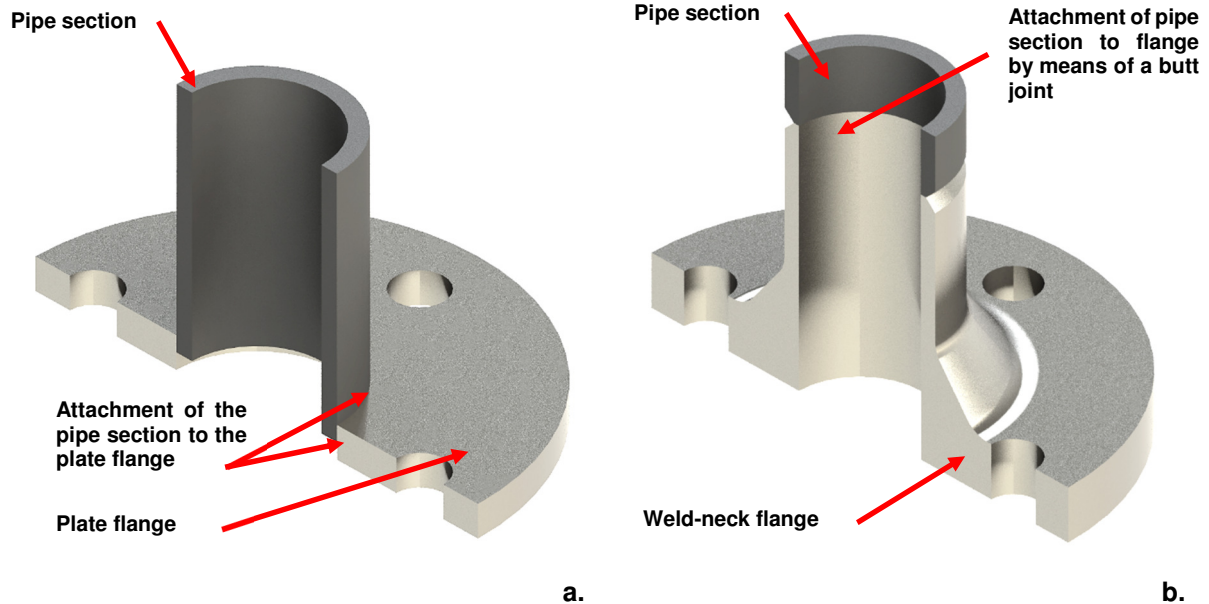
General attachment of (a) plate and (b) welded-neck flanges
